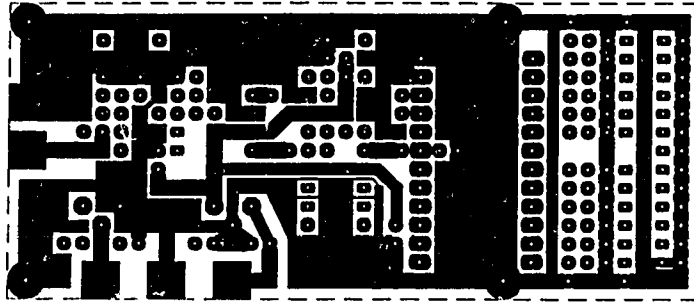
(a) *D/A converter board: Printed circuit board mask - top side
